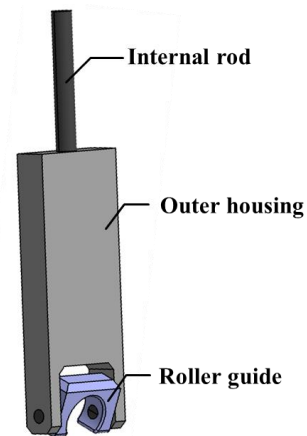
Punch assembly and its mechanism (Patent pending: No. 10-2013-0024711)
